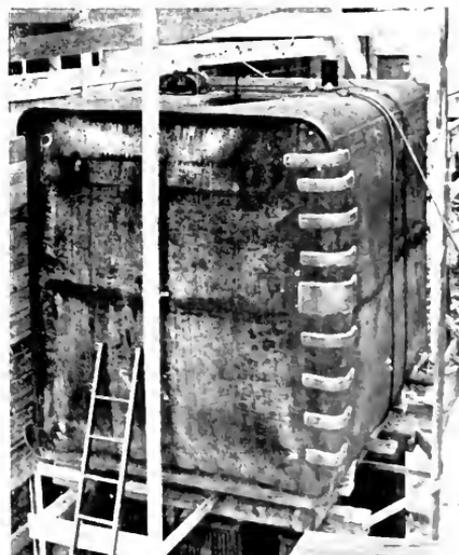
Box Under a Pressure of 40 lb. per Square Inch. The joint, including the bolt holes, had a maximum strain of 100,000 lb. per square inch from the position shown in Fig. 25. The sides of the box 7 1/2 inches in height, and 1/2 inch wide, were subjected to a snap subjecting welds to severe treatment.
